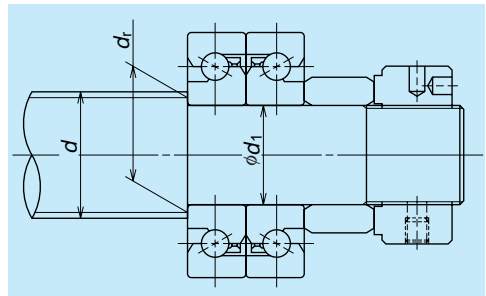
•2 Support bearing and end face (shoulder) for installation
